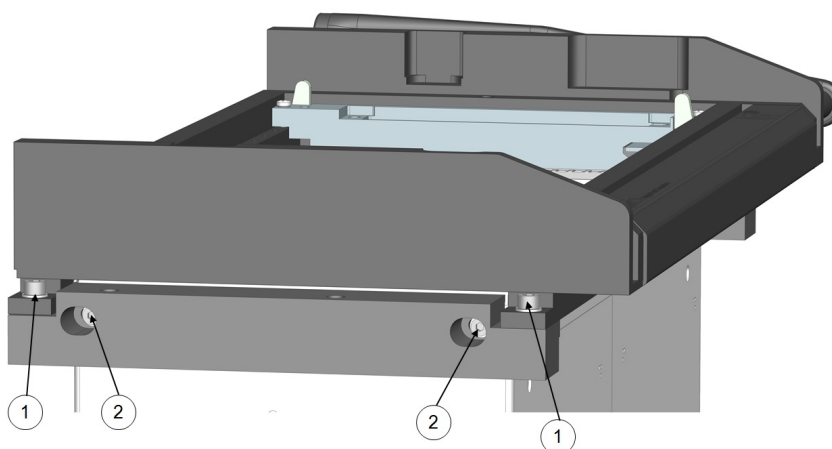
Interface and assembly tools placed and pre-mounted.
